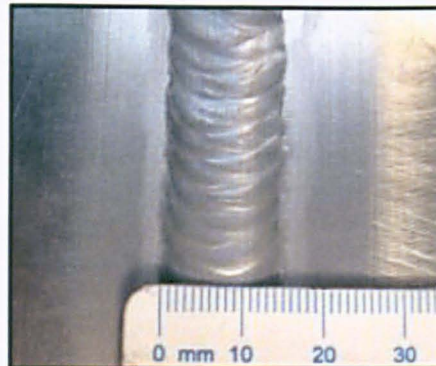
Weld bead deposited on aluminium CCT specimen by weave technique to provide adequate width.
